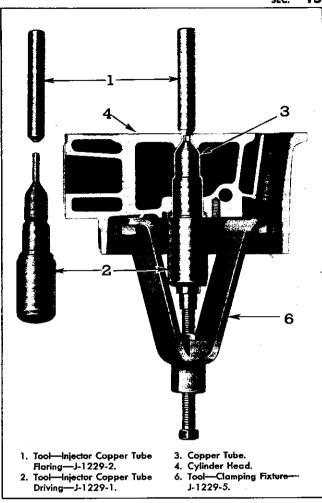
Installing Injector Copper Tube in Cylinder Head with Tools J-1229-1, J-1229-2 and J-1229-5 (Operation 2).
